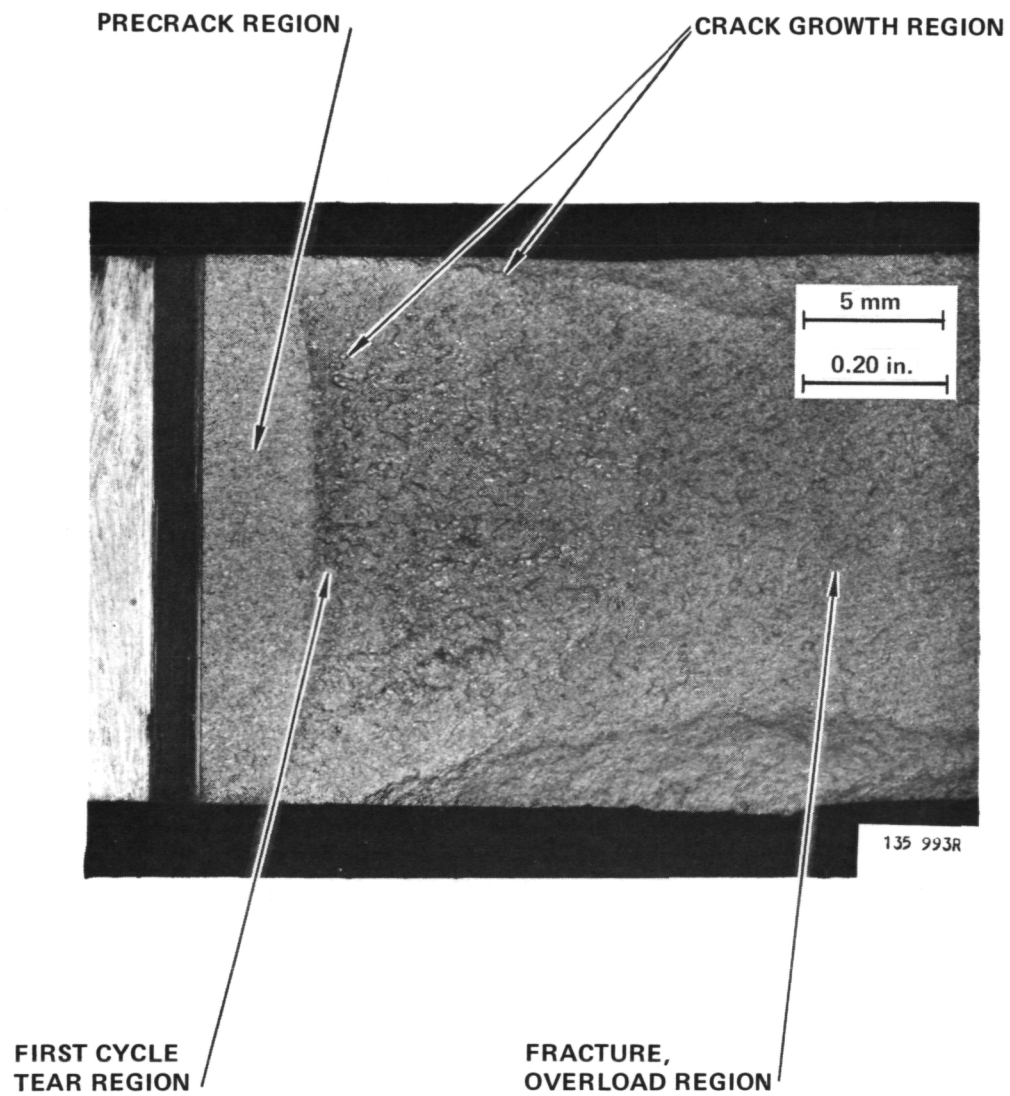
Fracture Surface of WOL Coupon 10CR-2
